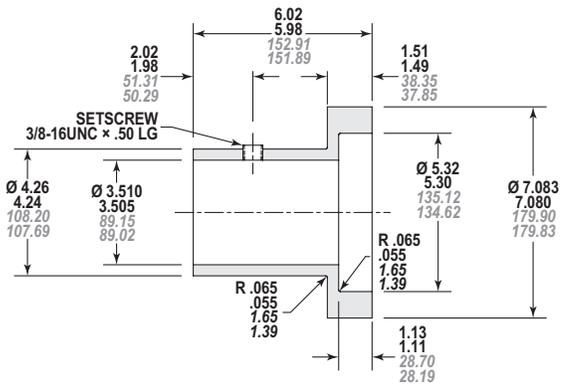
Drive Shaft Bearing Alignment Tool
